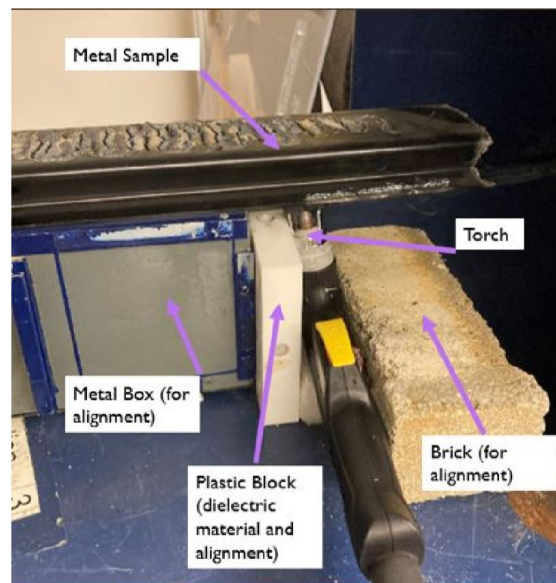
Setup for cutting metal components from below with the plasma torch.
